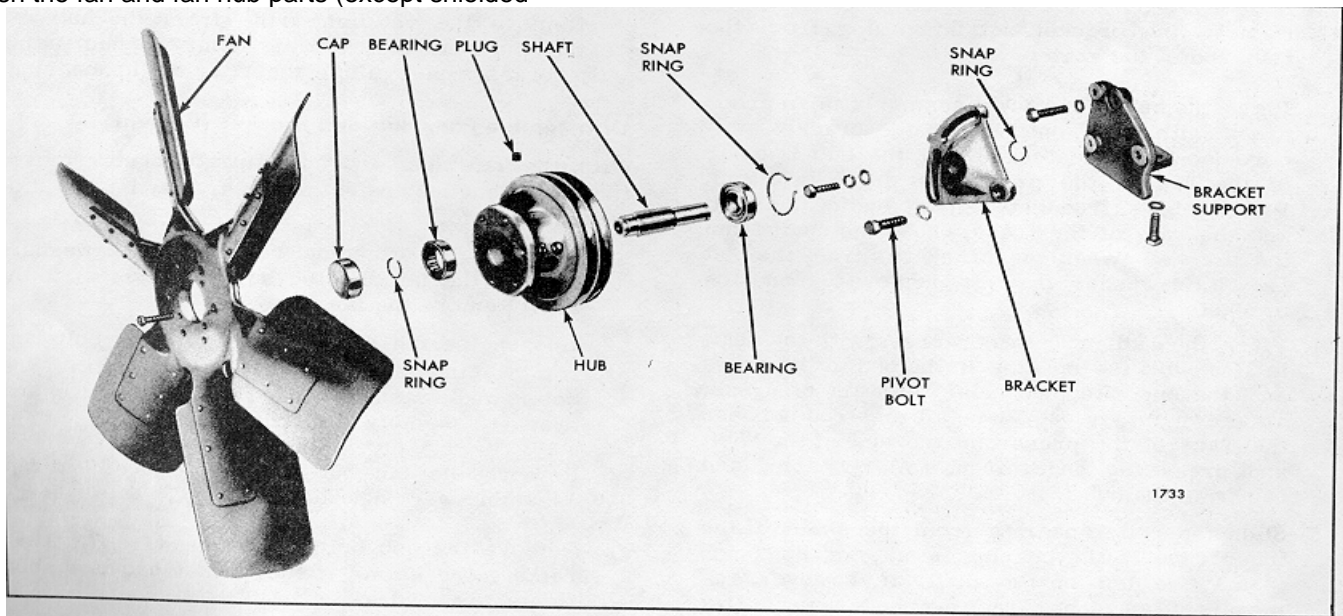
Fan, Hub and Adjusting Bracket Details and Relative Location of Parts
